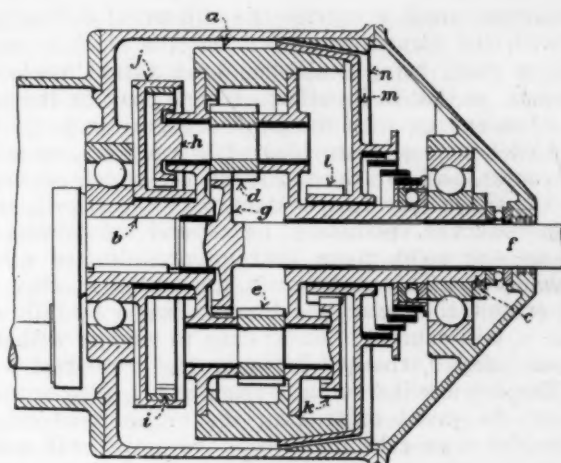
A UNIT CONSTRUCTION EPICYCLIC GEARBOX WHICH CAN BE BOLTED TO THE REAR END OF THE ENGINE
